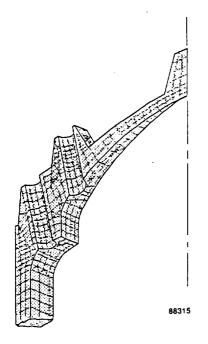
Mod II Configuration No. 4 Heater Casting Finite Element Model, 3-D View (Tubes, Sleeves, and Ring Removed)
